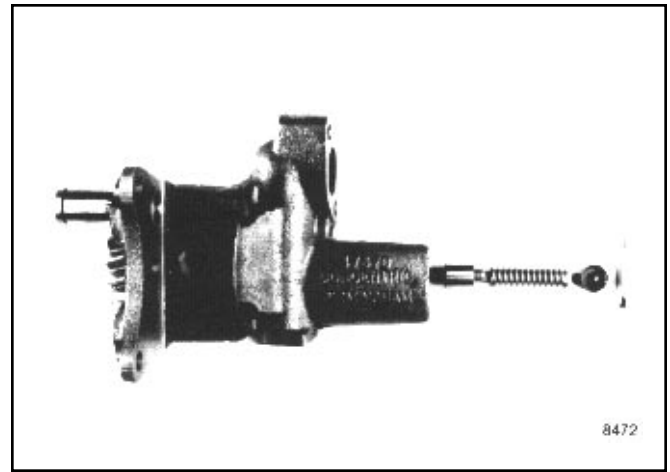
RELIEF VALVE FOR THE OIL PRESSURE
